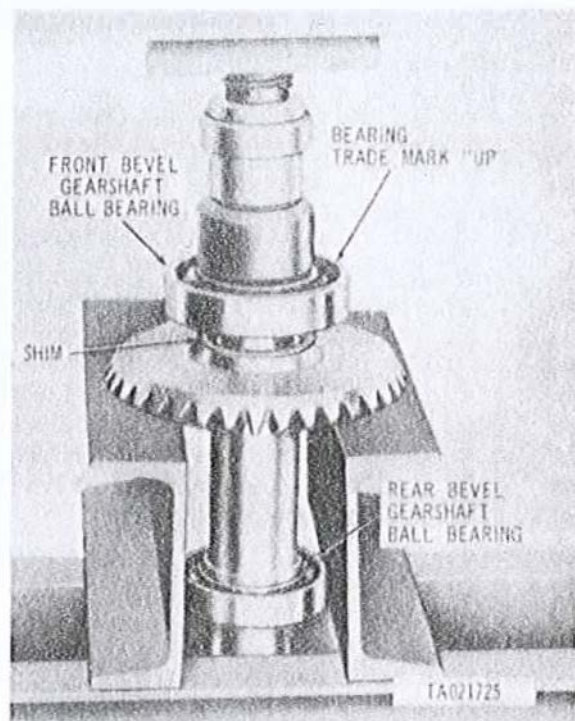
Pressing front bevel gearshaft ball bearing on gearshaft.
